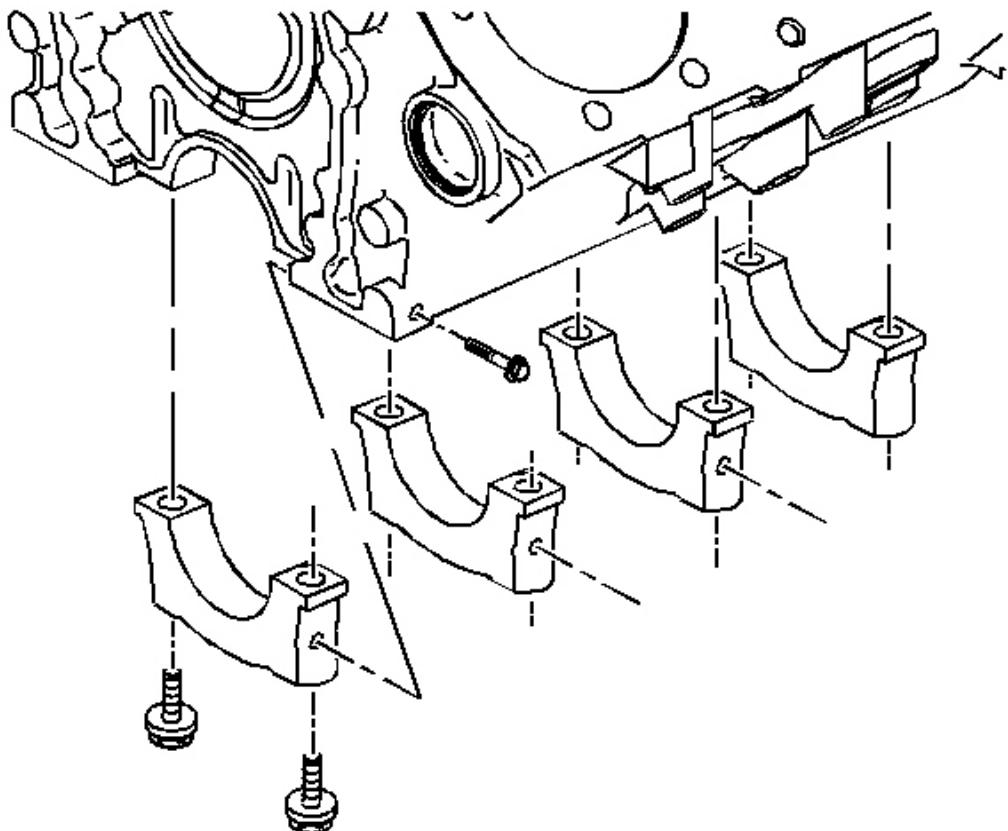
View Of Crankshaft, Bearings And Bearing Caps
